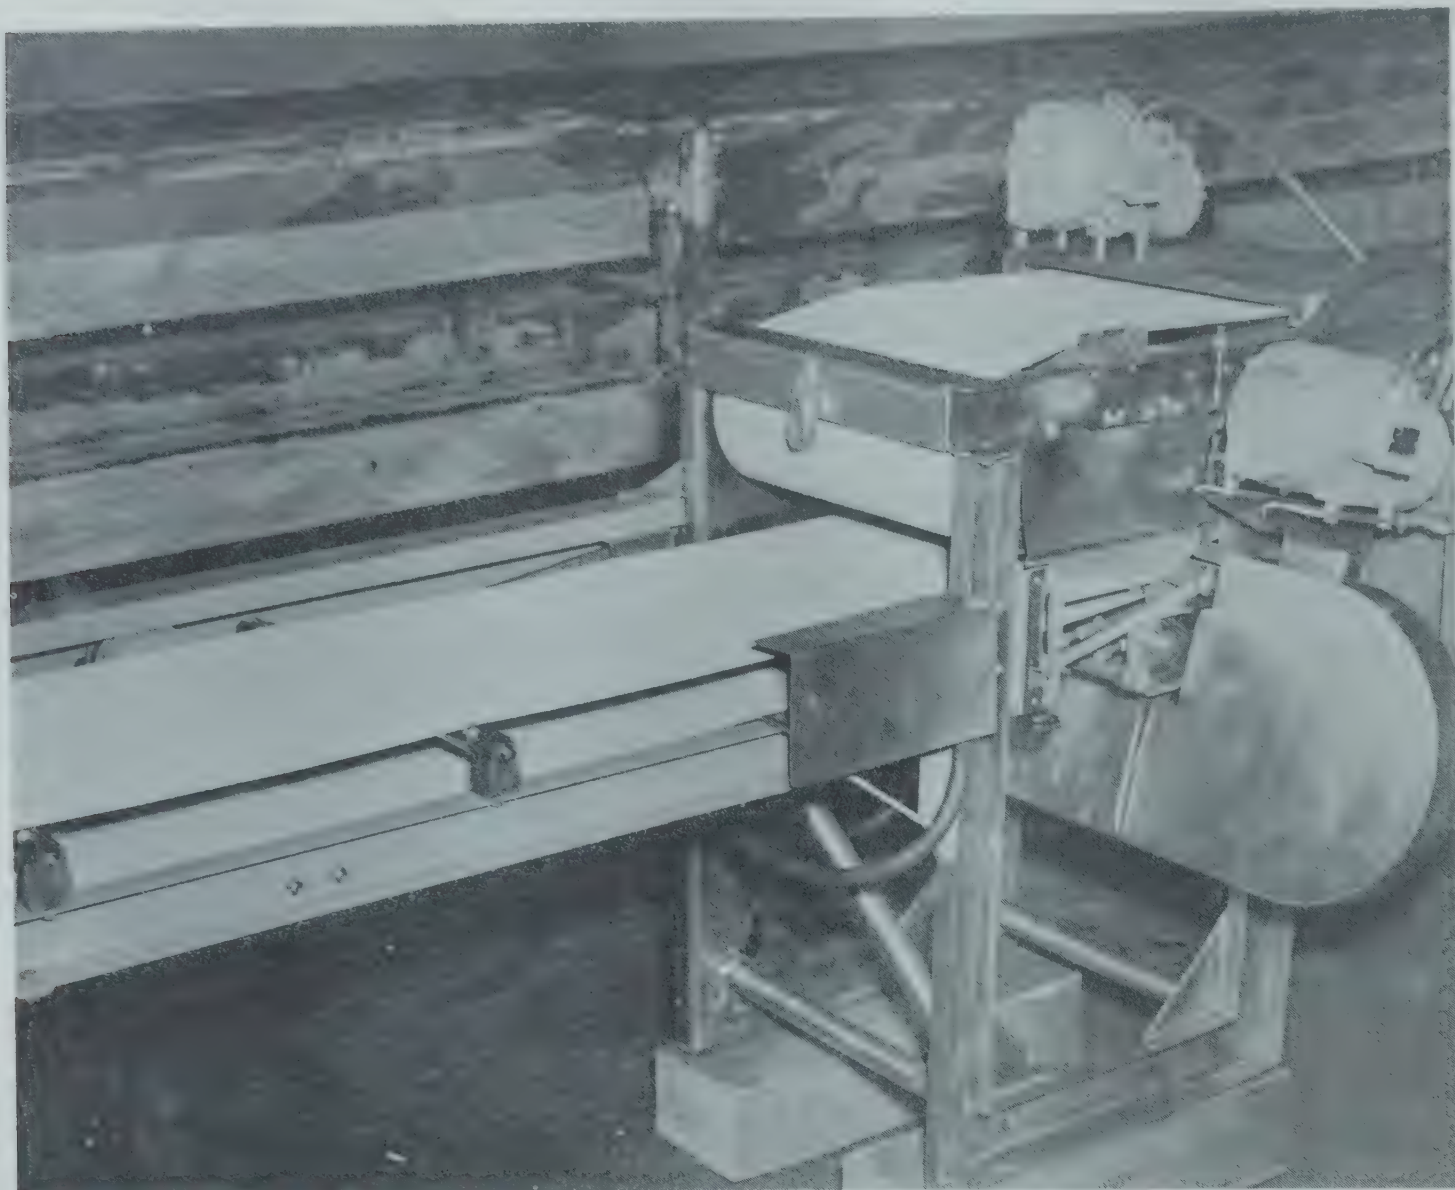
Typical skinning machine. (Photo courtesy of Jensen Equipment Company.)
